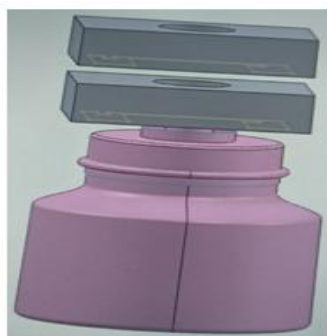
Shows a CAD model of the Transfluthrin Liquid Bottle of the Proposed Smart Mosquito Machine
